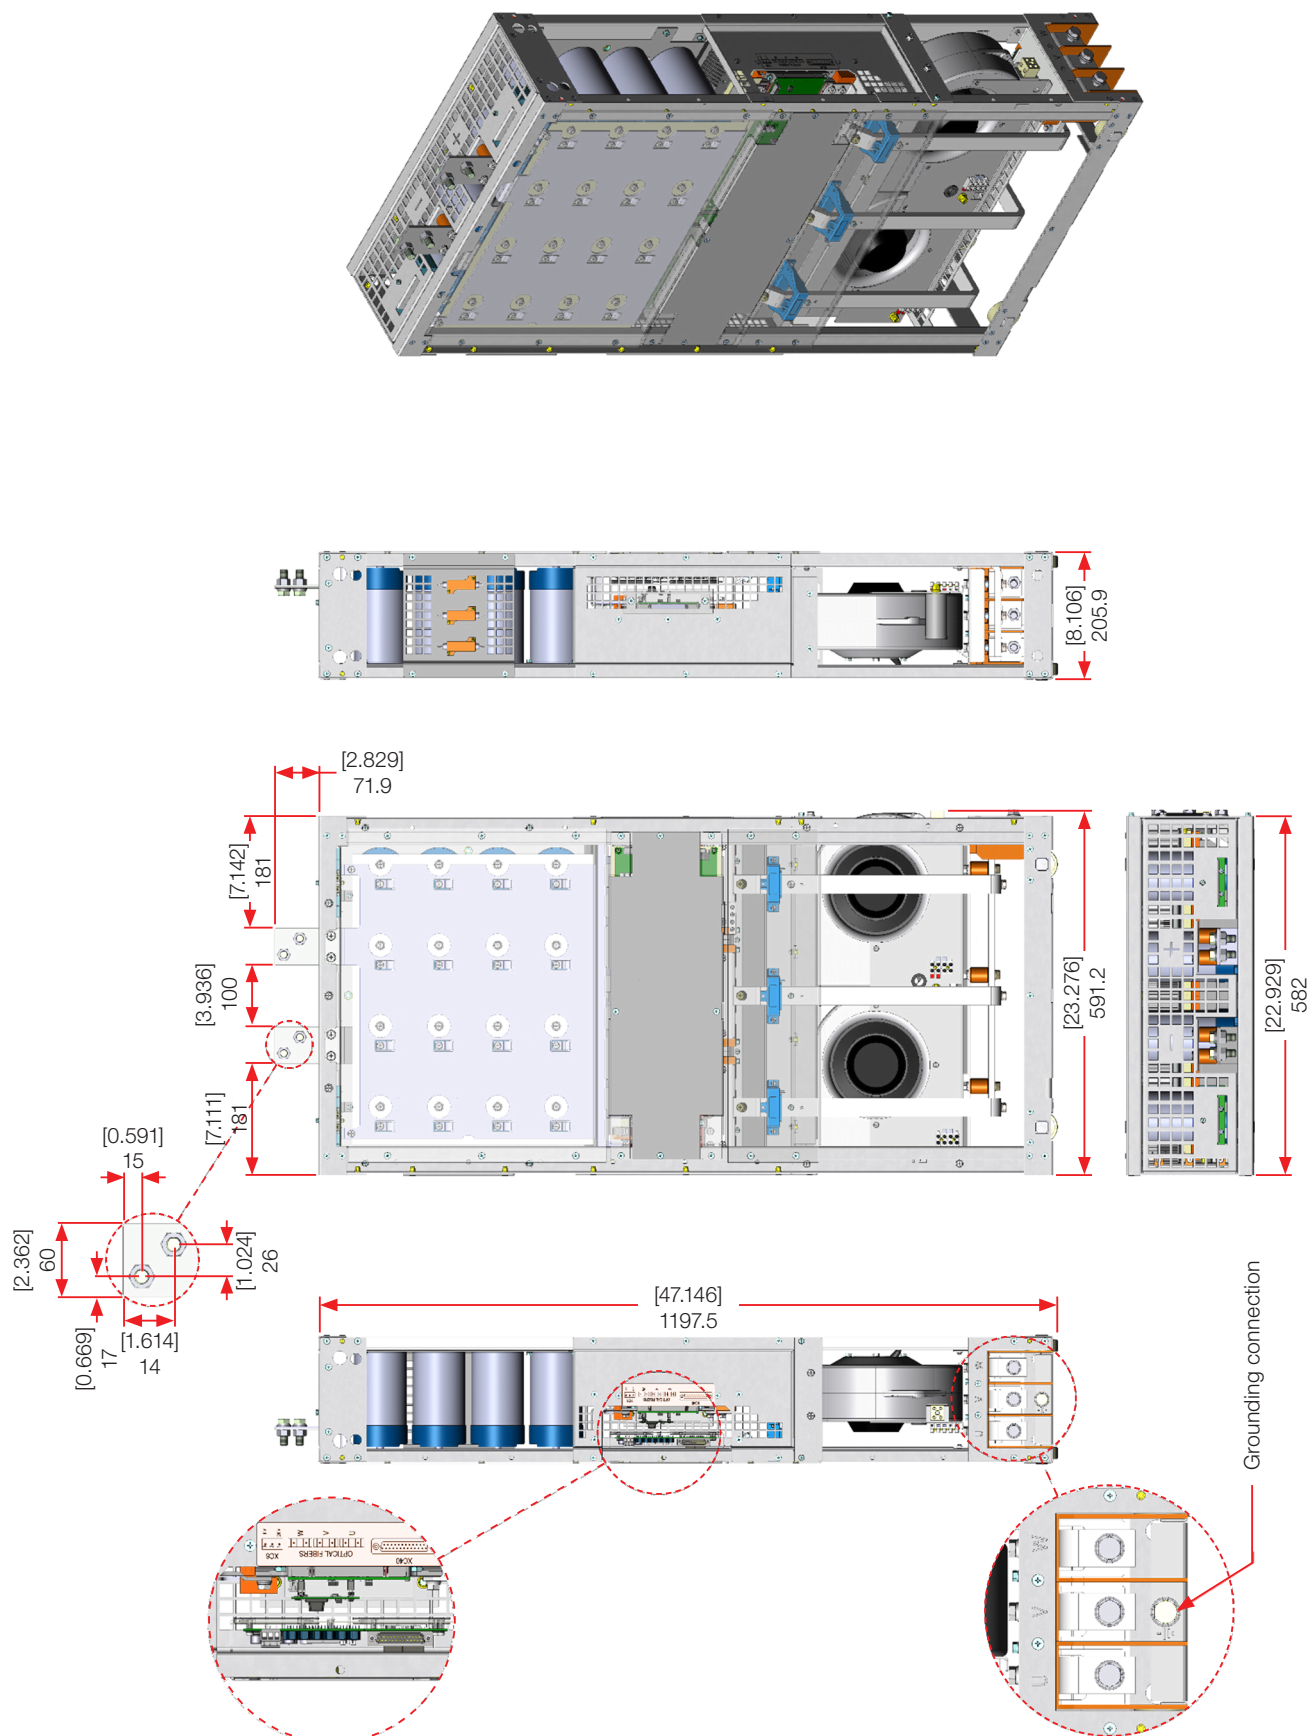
Mechanical dimensions of the UP11 G2 in mm [in]
